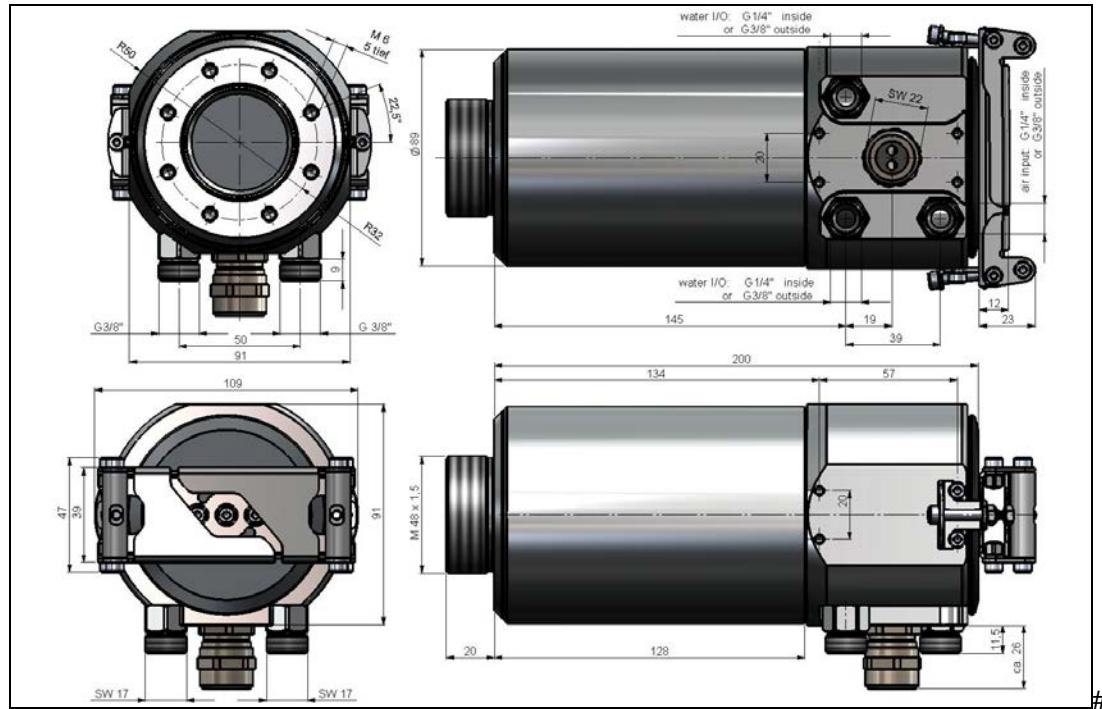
Protective housing, stainless steel, Incl. Mounting base [Part No.: ACPIPH]
